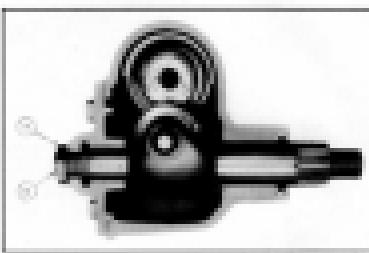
Steering Gear Cross Section Through Roller Shaft
